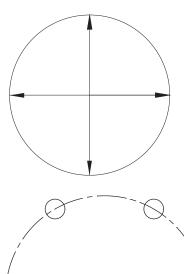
Identify Vertical Milling Axes, Polar Rotation, Quadrants, and Angular Values
